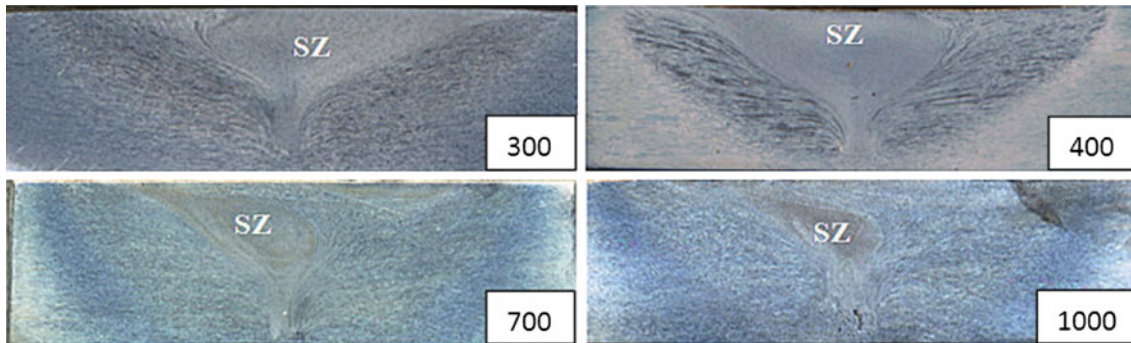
Macrostructure of cross section of friction stir welded joint
